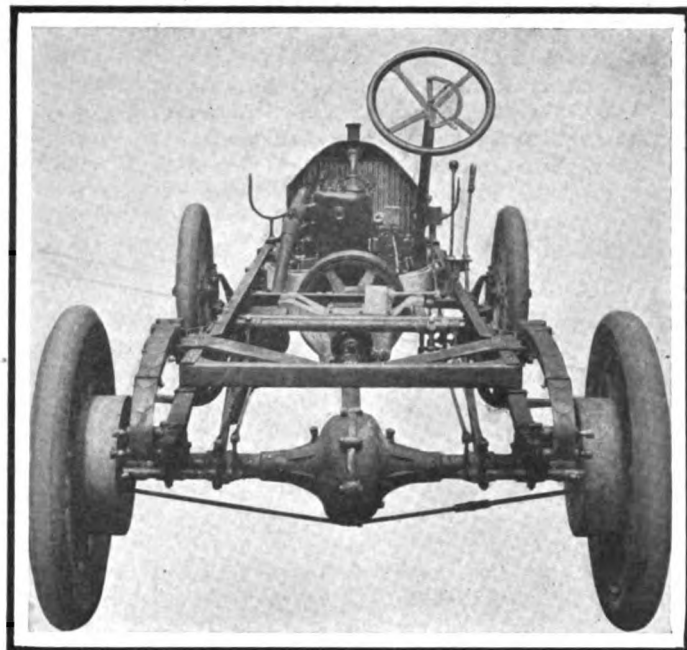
Rear view of the model 32, showing suspension and details of chassis construction
